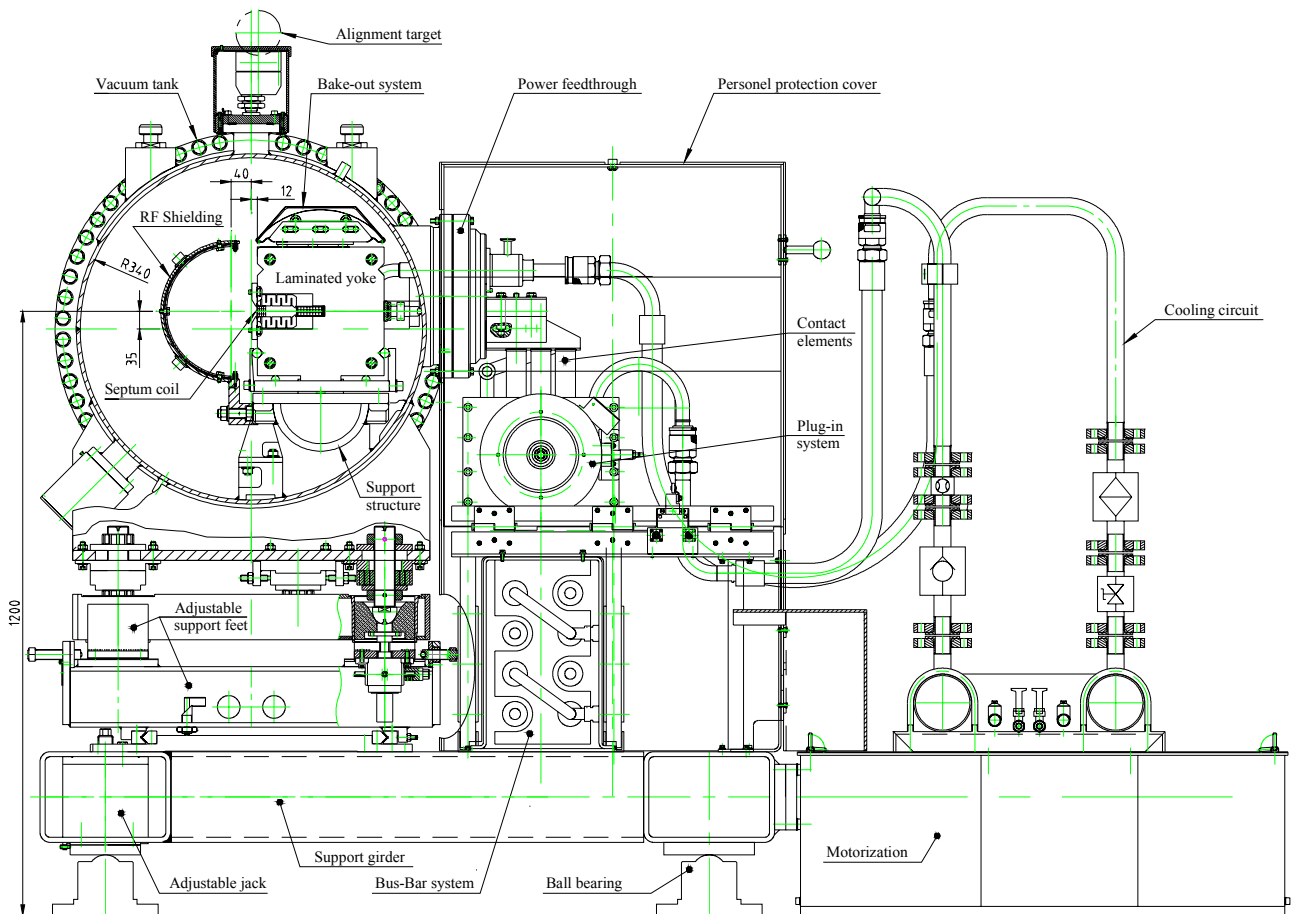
Cross section of MSE extraction septum showing vacuum tank, alignment girder, hydraulic and electrical connections.
